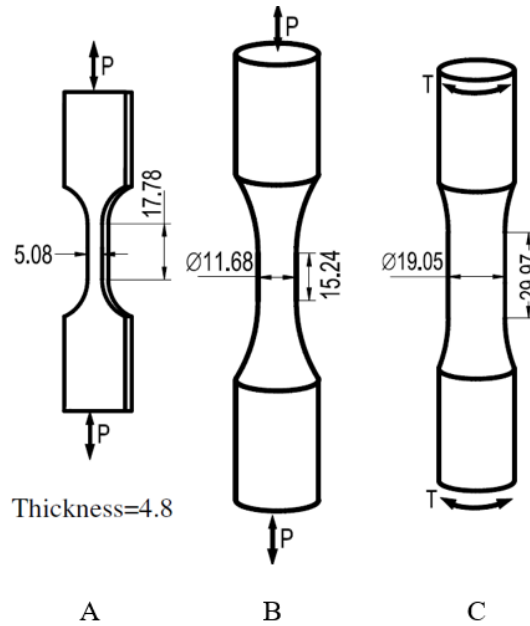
Conventional fatigue specimen geometries: (A) plane tensile; (B) cylindrical tensile; (C) cylindrical pure torsion [15].
